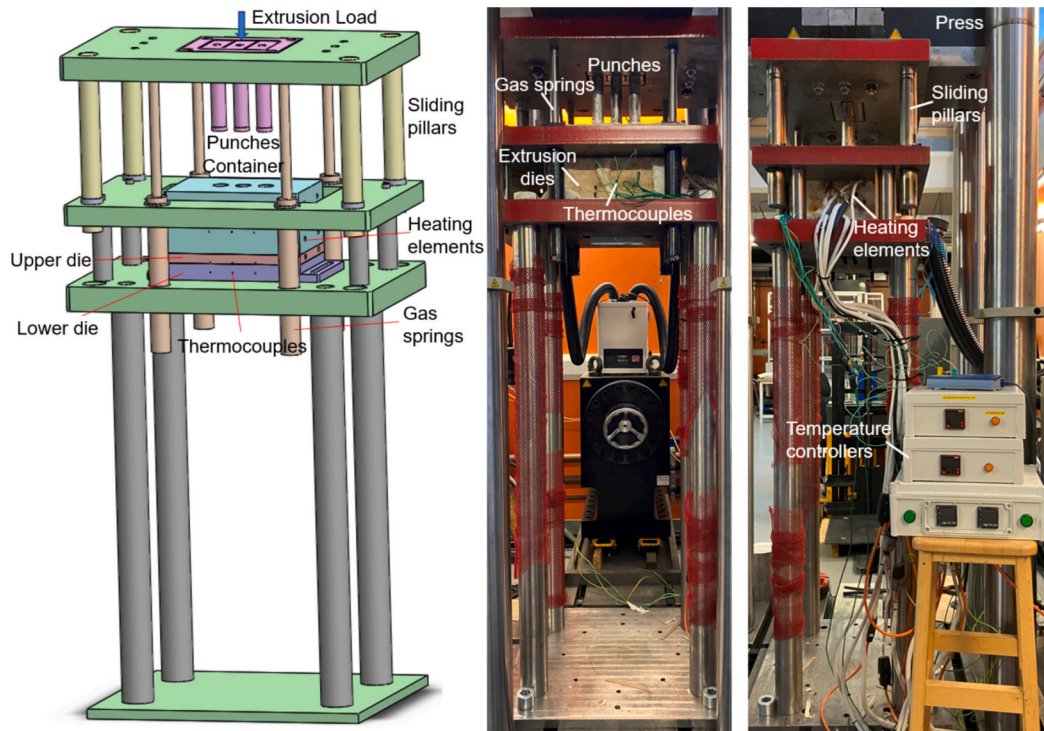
Extrusion system consisting of dies, punches, heating system, extrusion press and other supporting components.
